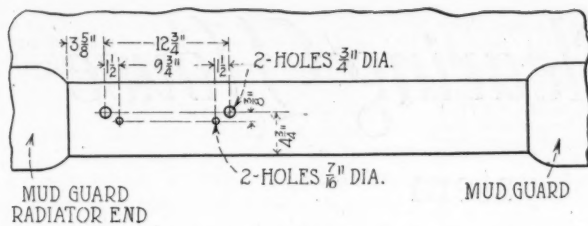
Location of holes on left-hand runningboard for mounting storage box with improved chain-drive Genemotor
